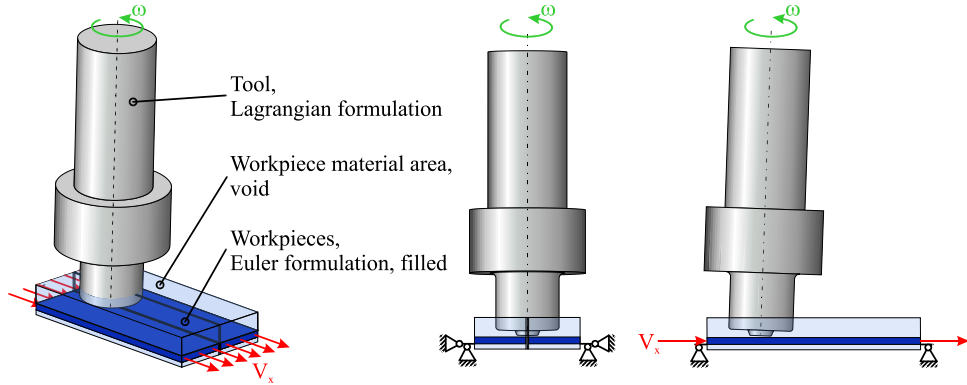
Schematic model assembly. Illustrated without fixture and without tool shank.
